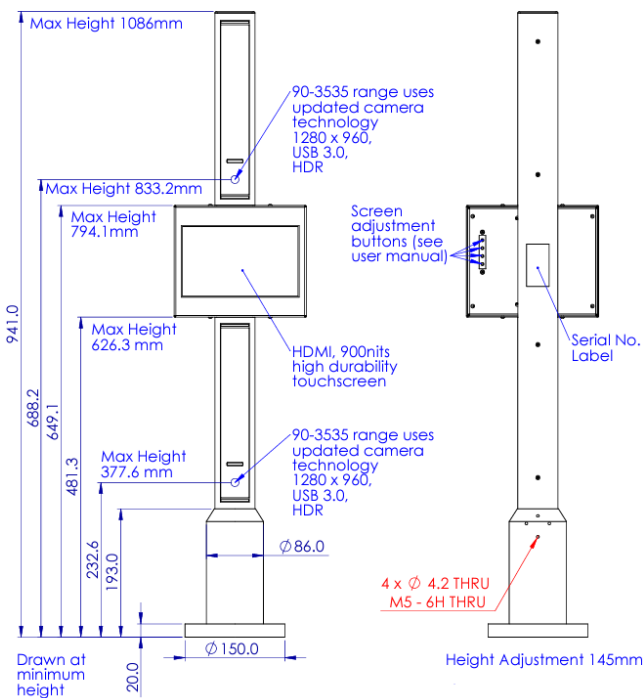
Dimensional drawing of the ASLOC Single USB3 710 Landscape with base.
